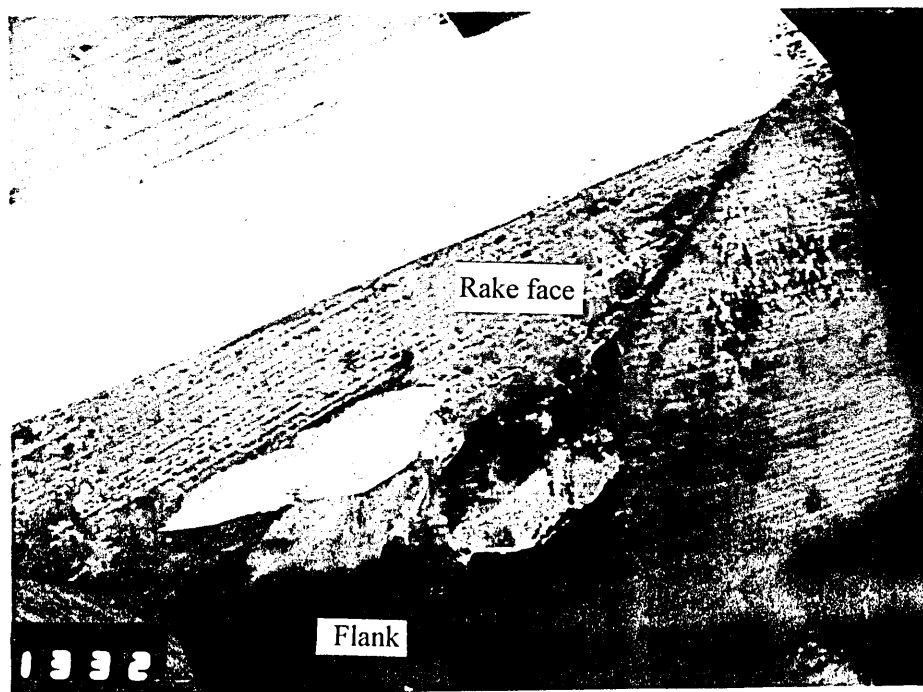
The edge chipping on roughing tooth produced when sawing 302S25 stainless steel with segment type A1
